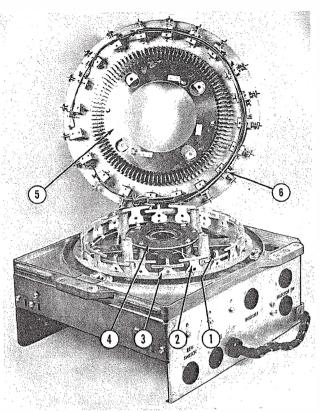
ELECTRIC SELECTOR ASSEMBLY, 2410
